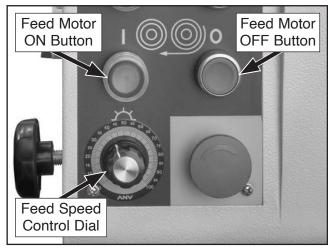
Location of feed motor ON and OFF buttons and feed speed control dial.
